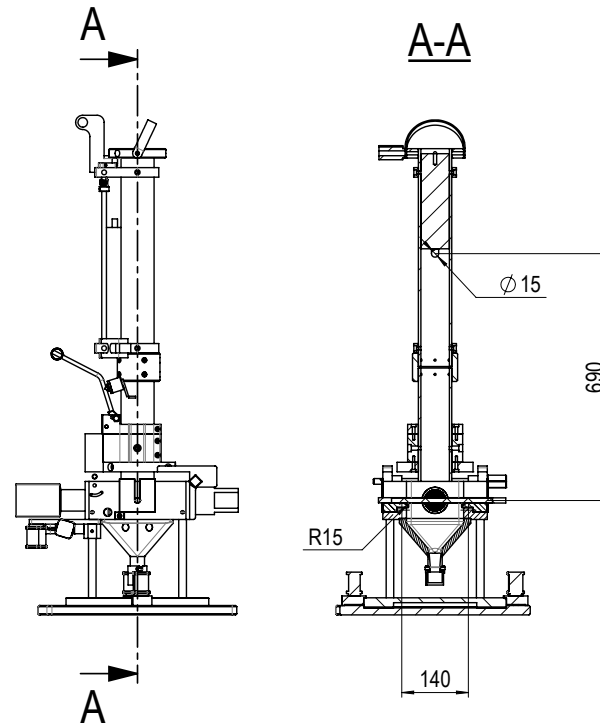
2D drawing and main dimensions illustration of the revised impact tower.
